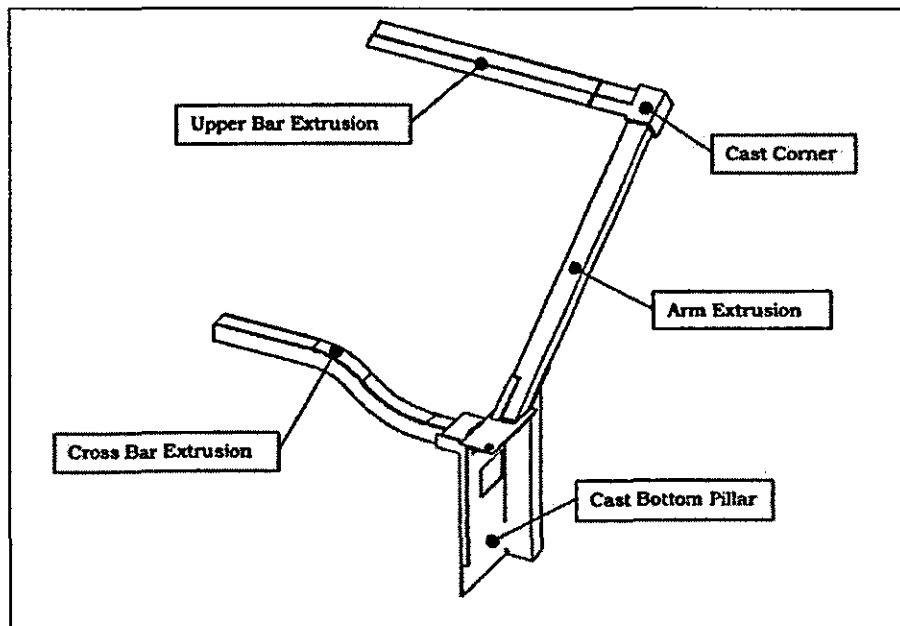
Hypothetical MIG welded aluminium frame (Painter, 1995)
